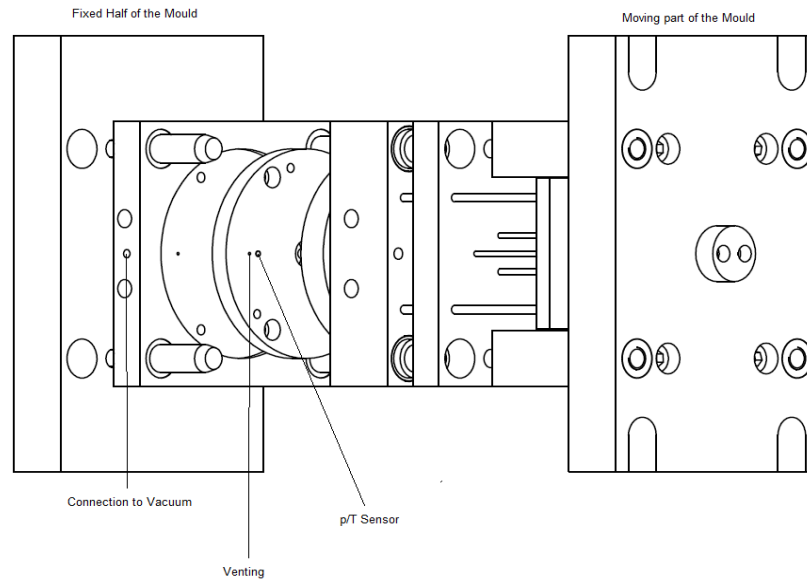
Technical drawing of the 2-plate mould showing the p/T sensor and venting system.
